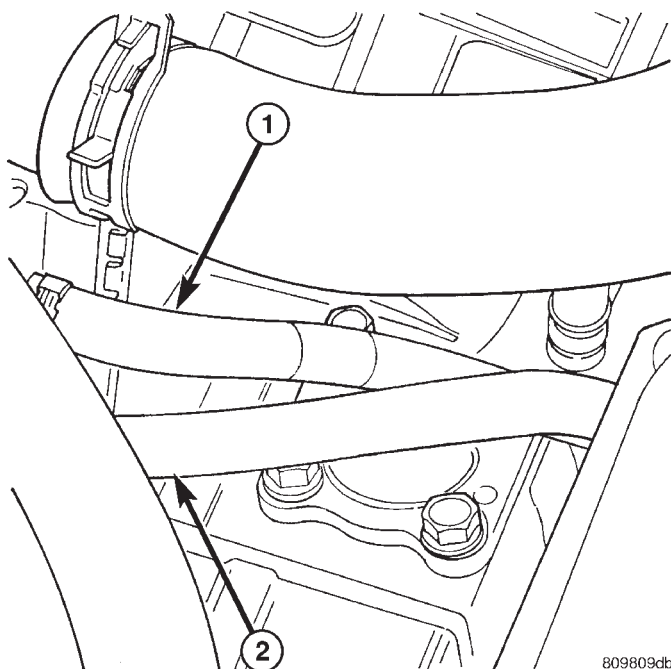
POWER STEERING GEAR OUTLET AND RETURN HOSES
